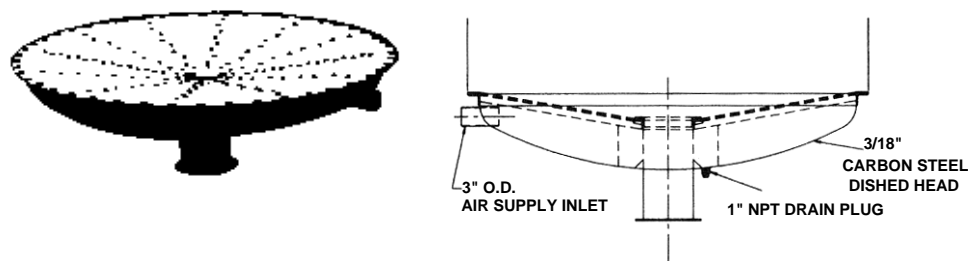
Fluidized bed activator. *Courtesy of Premier Pneumatics, Inc., Salina, KS, USA
